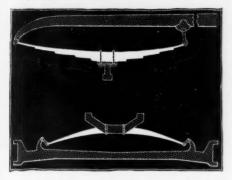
Upper illustration shows the halfelliptic spring which is in use on the majority of motor cars. The lower picture shows the Ford front spring suspension
